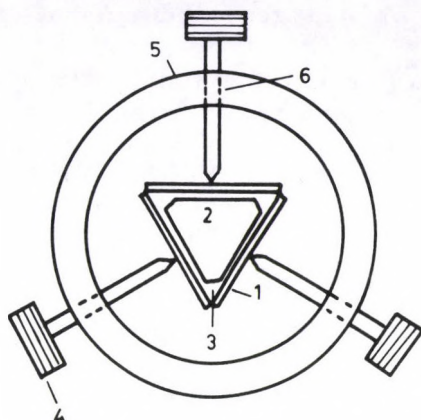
Model for construction. 1 – piezo plate, 2 – middle guide block, 3 – air space, 4 – screw, 5 – adjusting vessel, 6 – thread-in vessel
